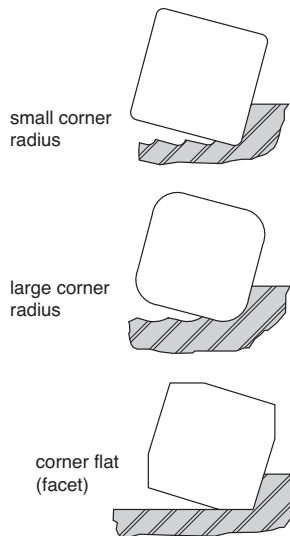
Larger insert corner radii or flats produce finer milling finishes.
